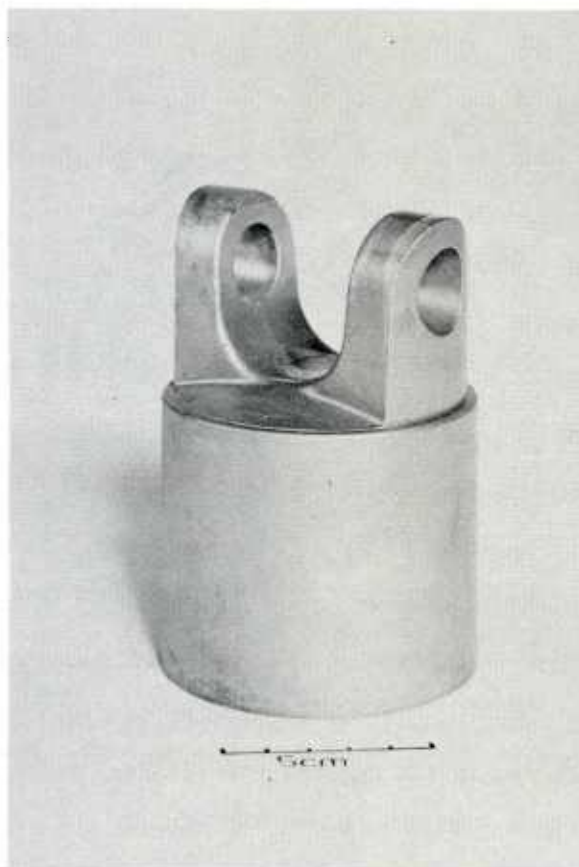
Prototype Hooks Joint Component. This illustrates the use of sliding cores for lateral through-holes. Made successfully in a range of casting and forging alloys. Component weight: 0.9 kgs.
